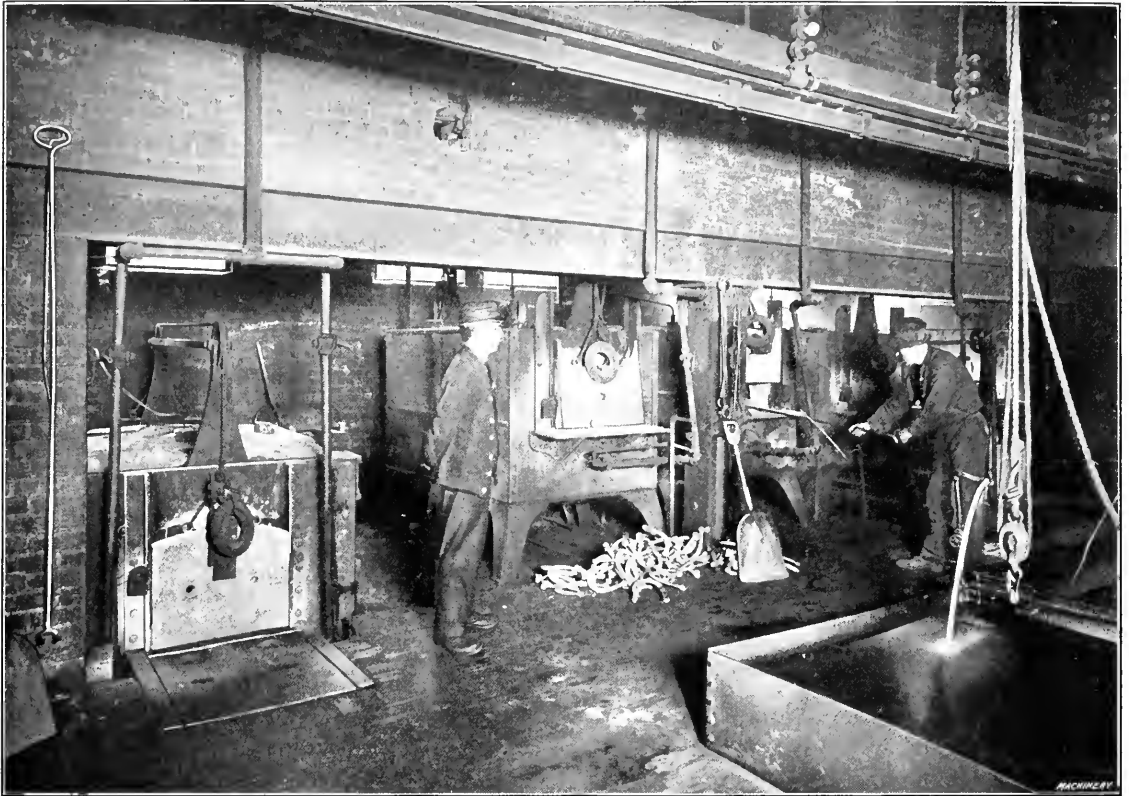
Arrangement of Hardening Furnaces and Quenching Tanks
